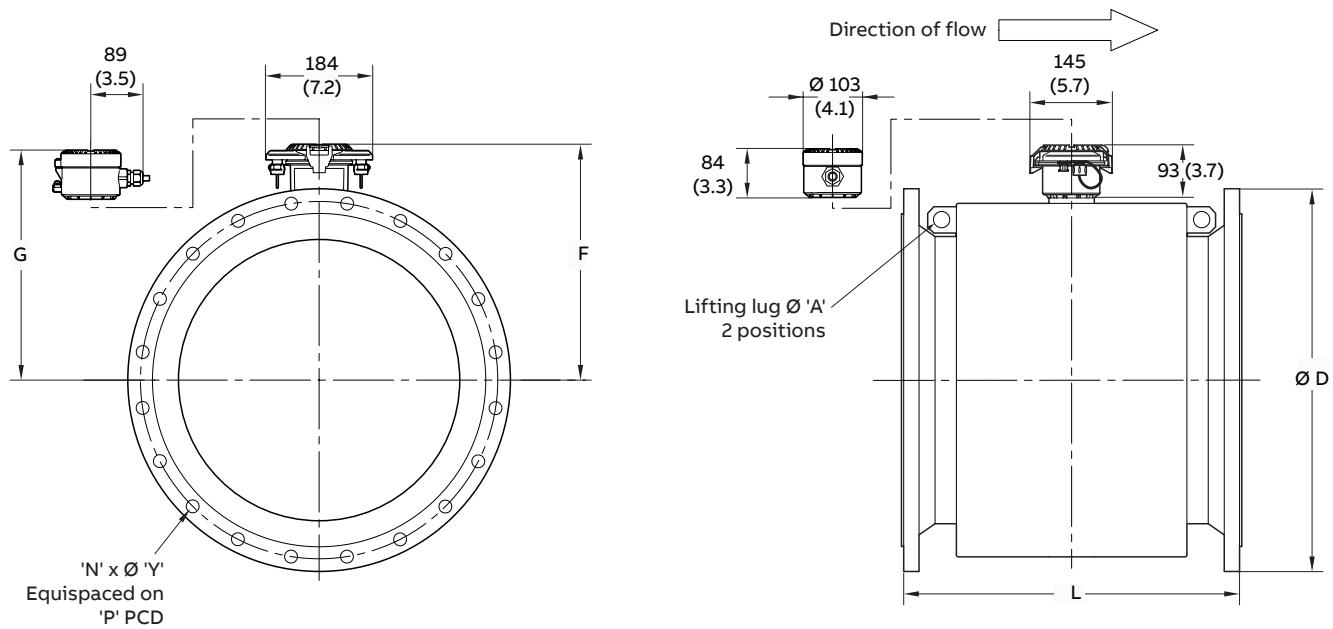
F-style sensor – DN450 to 600 (18 to 24 in.)
